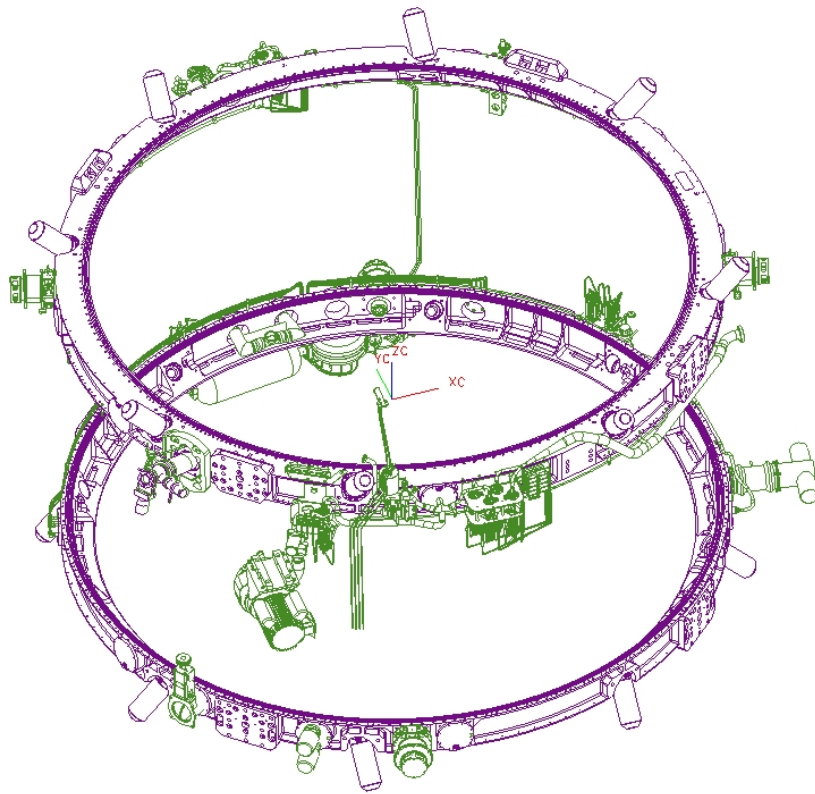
Vacuum Case Assembly (With Misc. Port Attachments)
